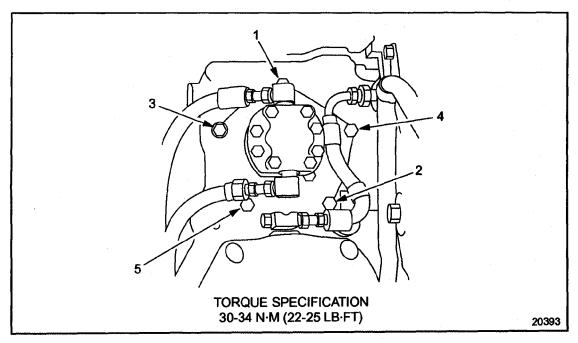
Fuel Pump Drive Retaining Bolt Torque Sequence
